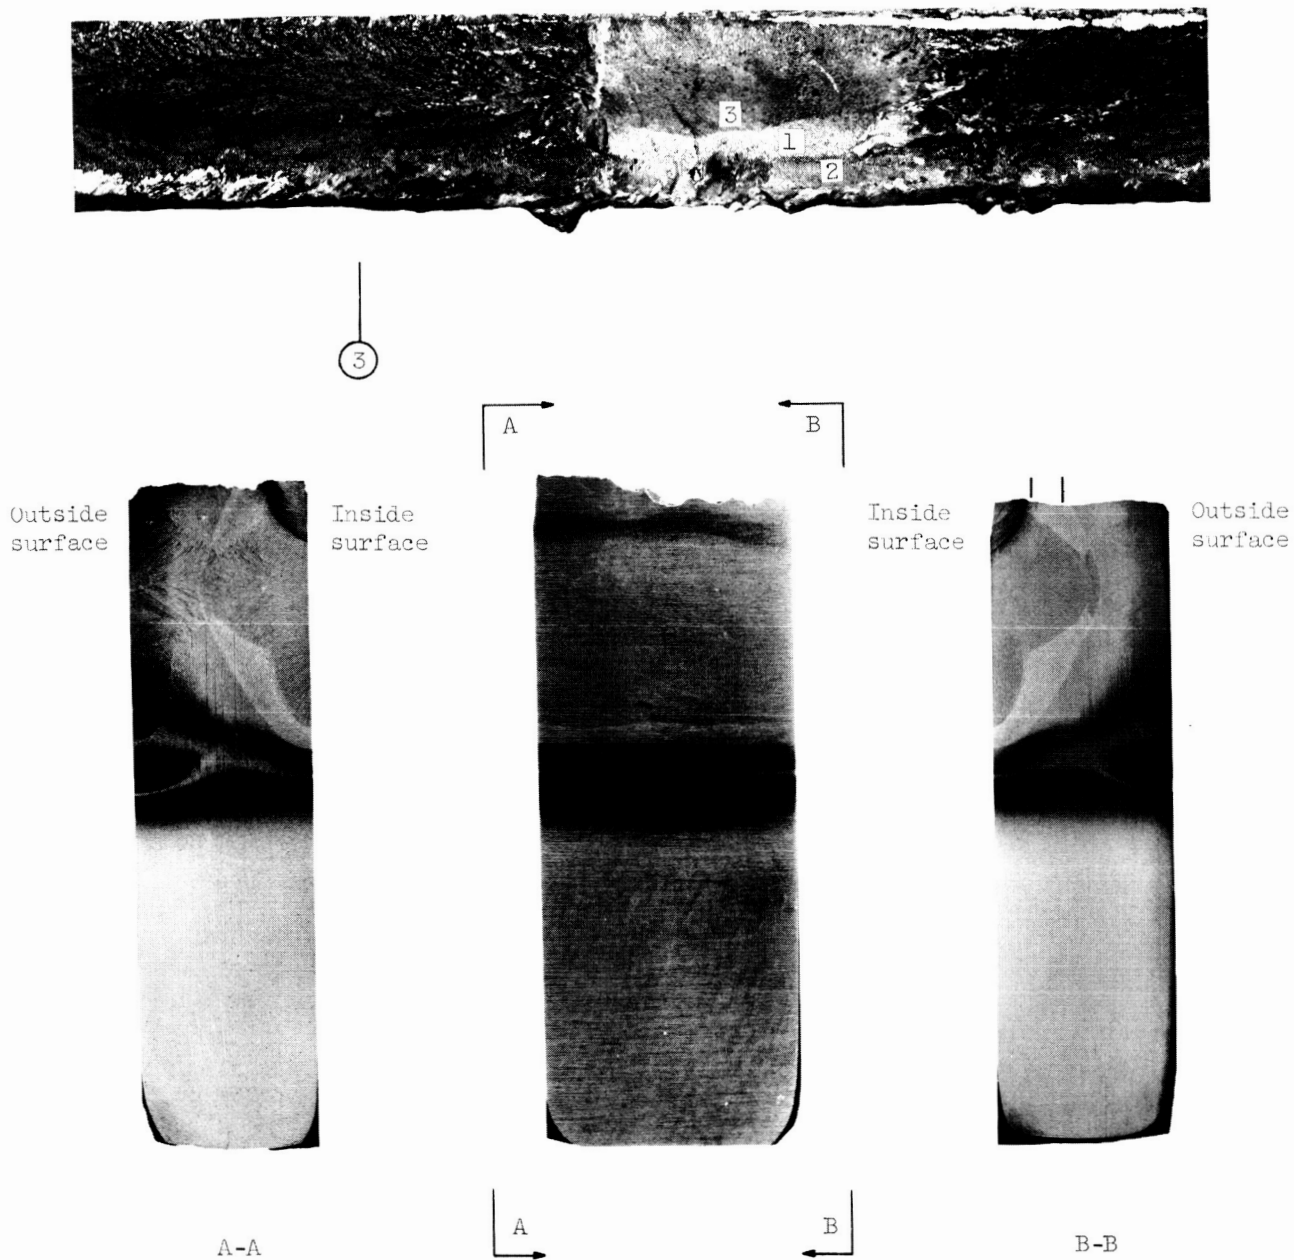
Plan view of fracture paths (inside surface of motor case shown).
